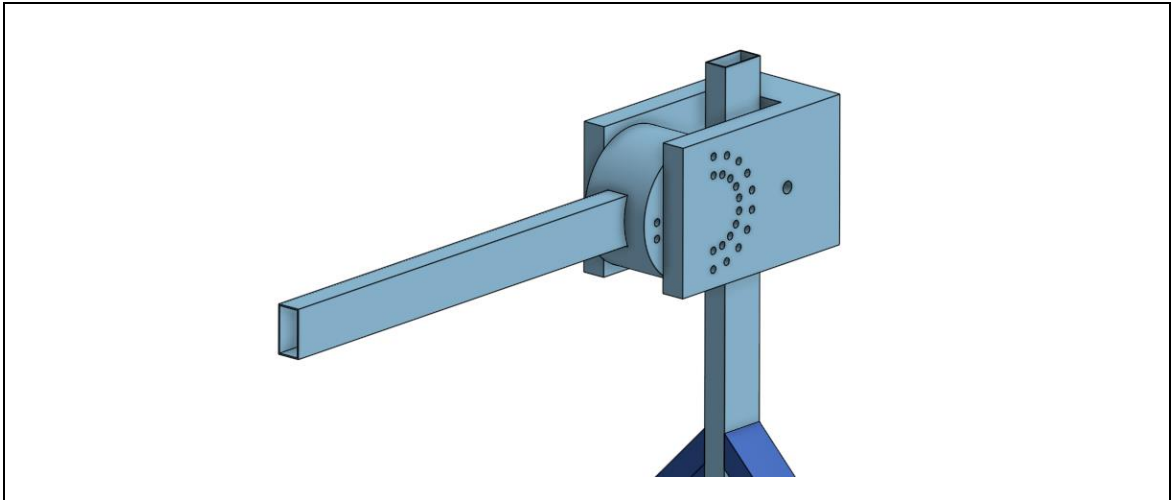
Isometric view of the assembled solid model of the linear transport assembly
